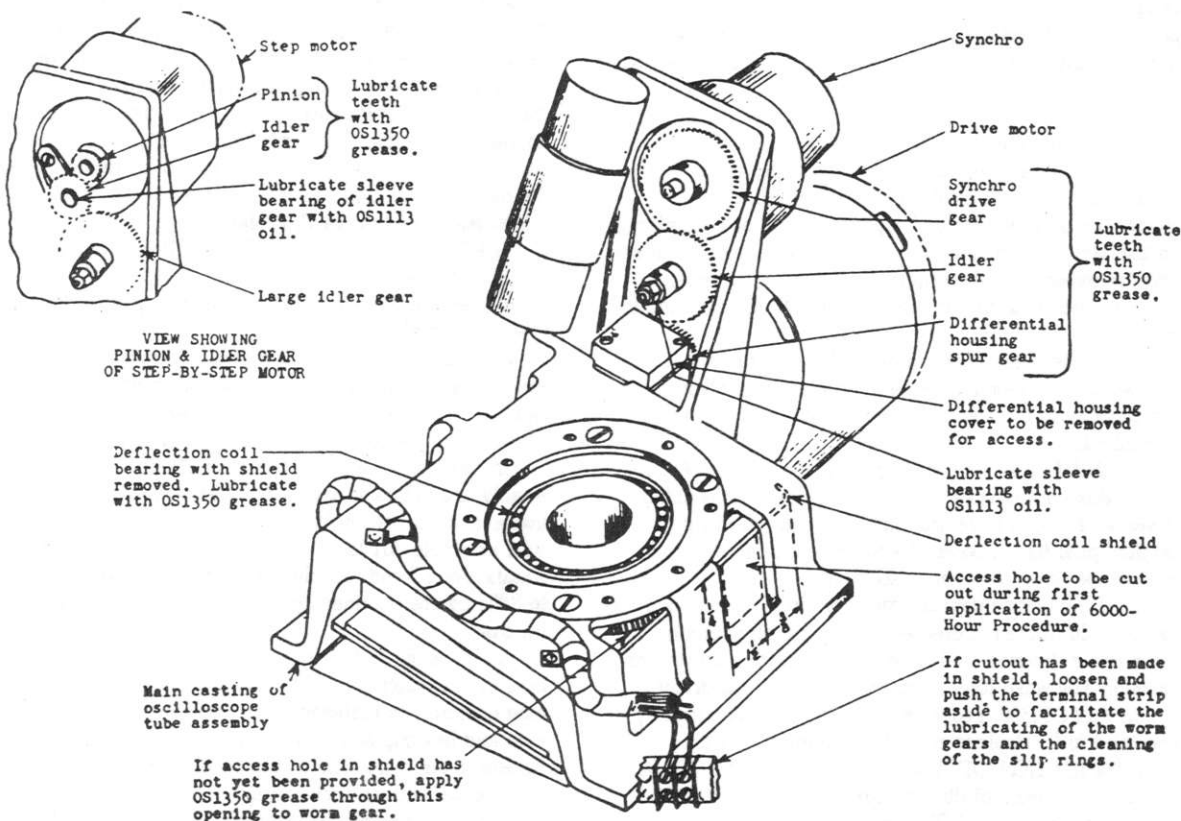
Location of 1,500-hour lubrication points and access hole in shield.
